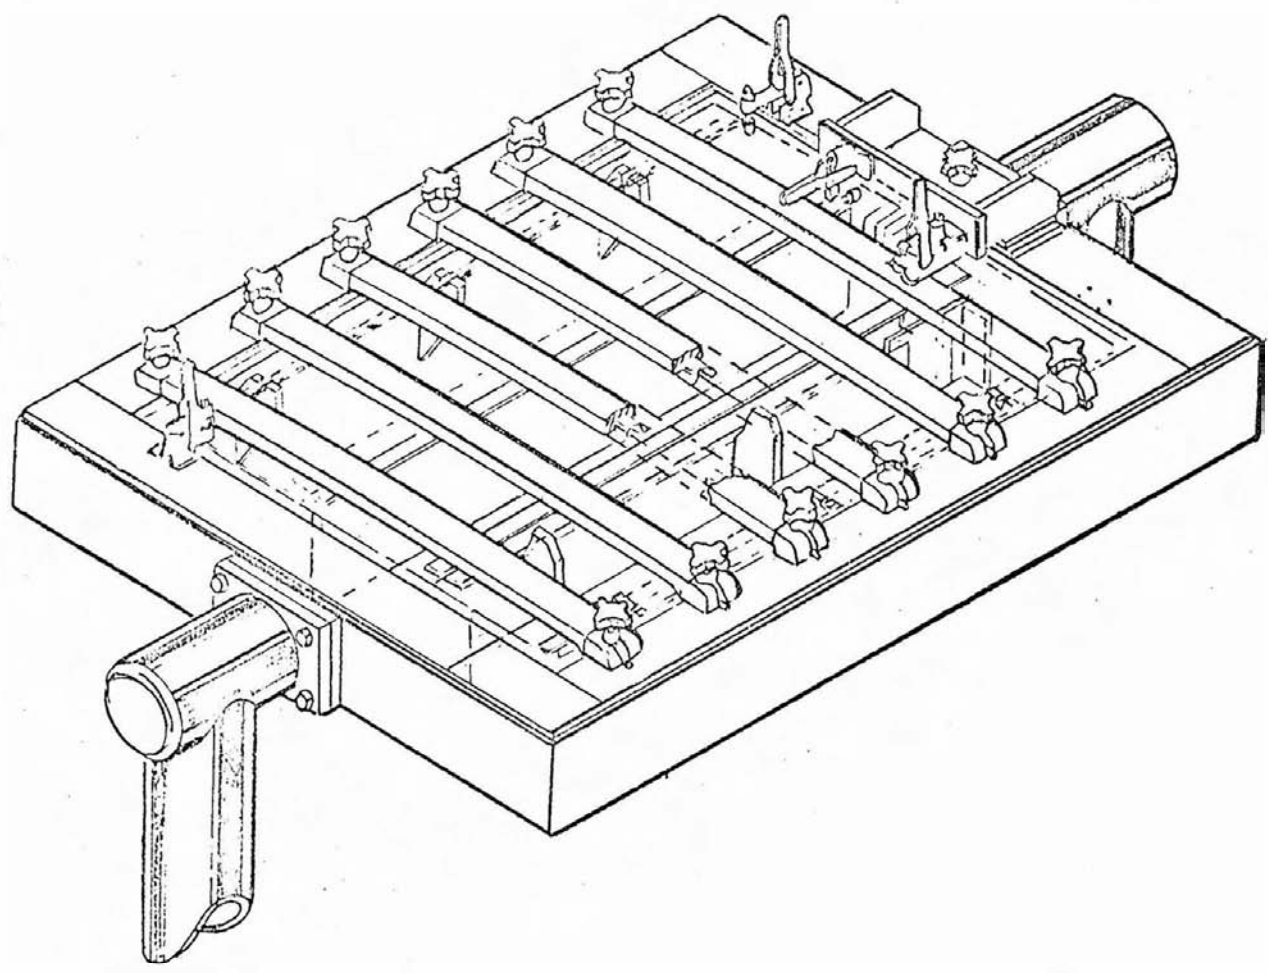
Umbilical Door Assembly Fixture AF-B425-14260
